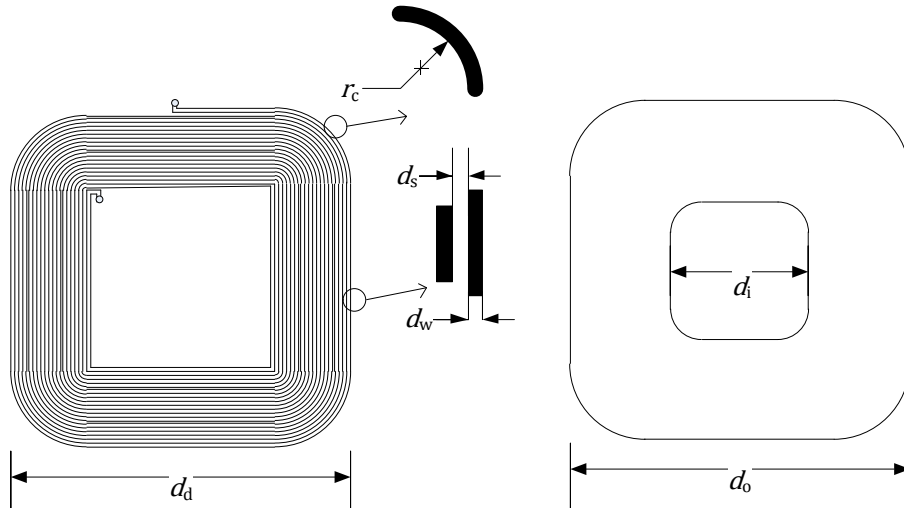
Top view of PCB and wire-wound Primary Coil of Power Transmitter design B5
